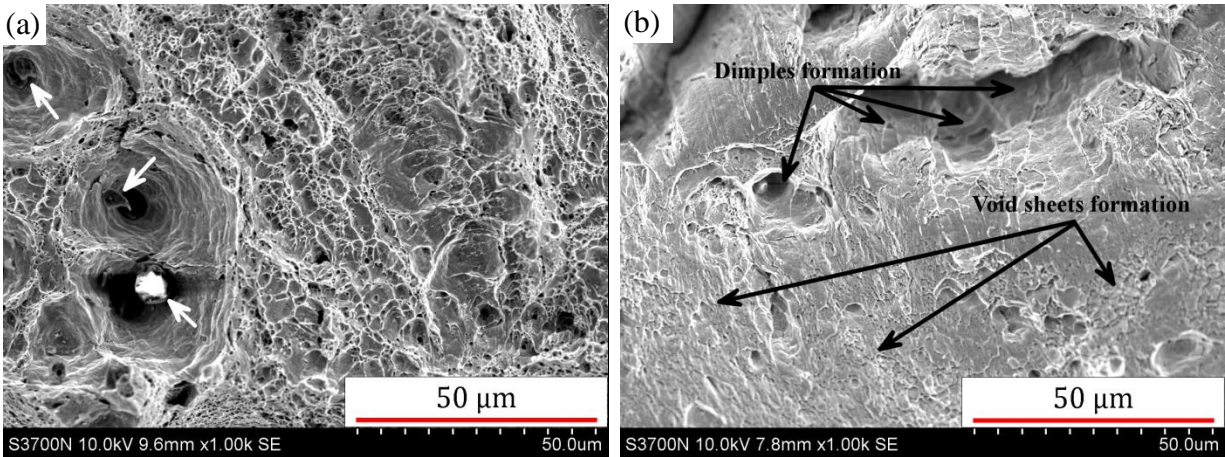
Tensile test fracture surfaces of (a) CA6NM steel and (b) 415 steel; some intact/broken inclusions and micro-voids are shown by the arrows
